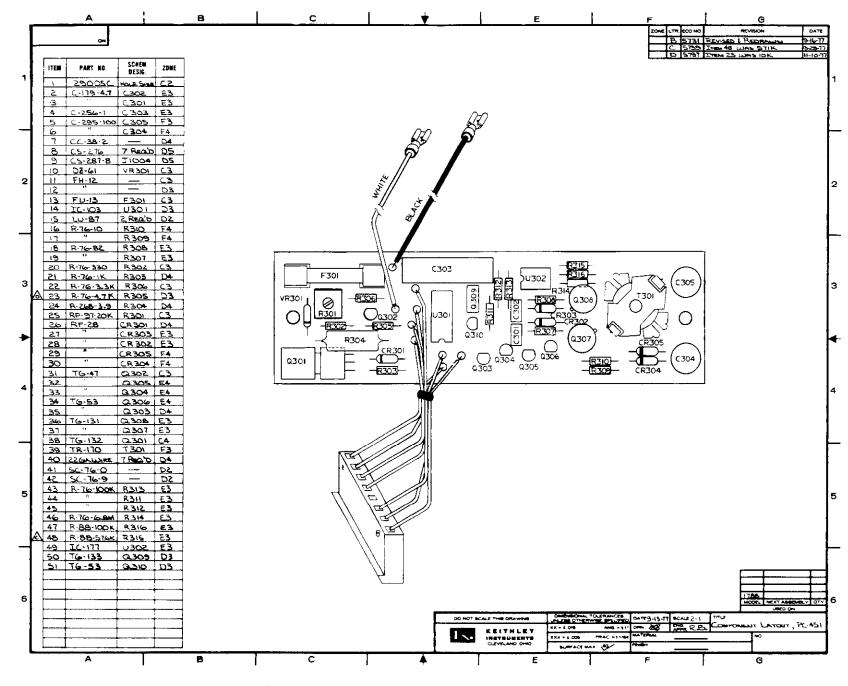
Component Layout, PC-451, Battery Pack Board.
